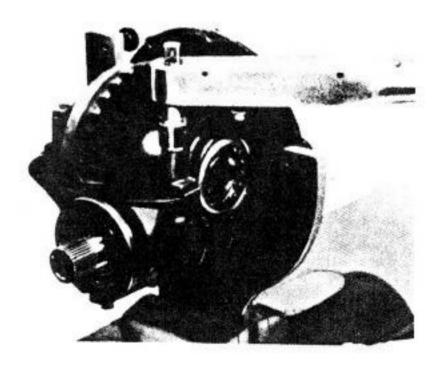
Torquing bolts on the differential carrier bearing cap:
